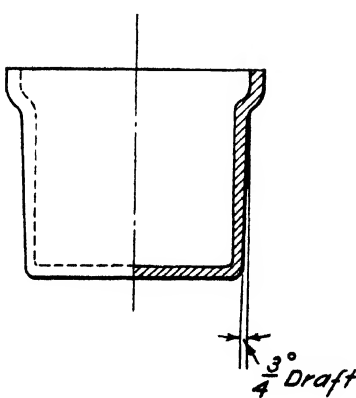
This cup, molded of cellulose acetate, has negligible draft on the inside because, for ejection purposes, it is desirable that the part slips freely out of the mold cavity and clings to the force. The part is later stripped off the force, leaving no pushout-pin marks that are visible from the outside.
